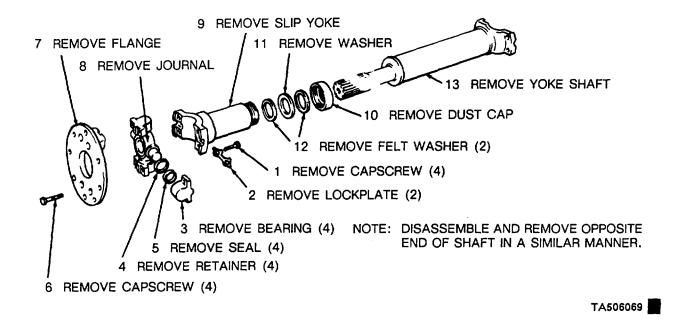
Propeller shaft and universal joint, removal and disassembly, exploded view.
